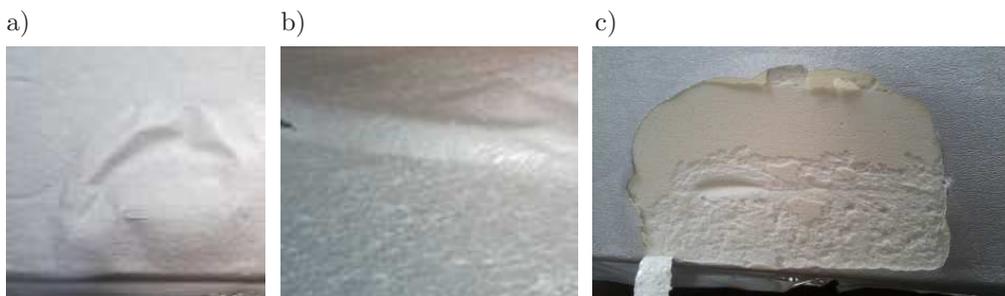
a) blister, b) blister with damaged face sheet, c) visible core after removing the blister.
